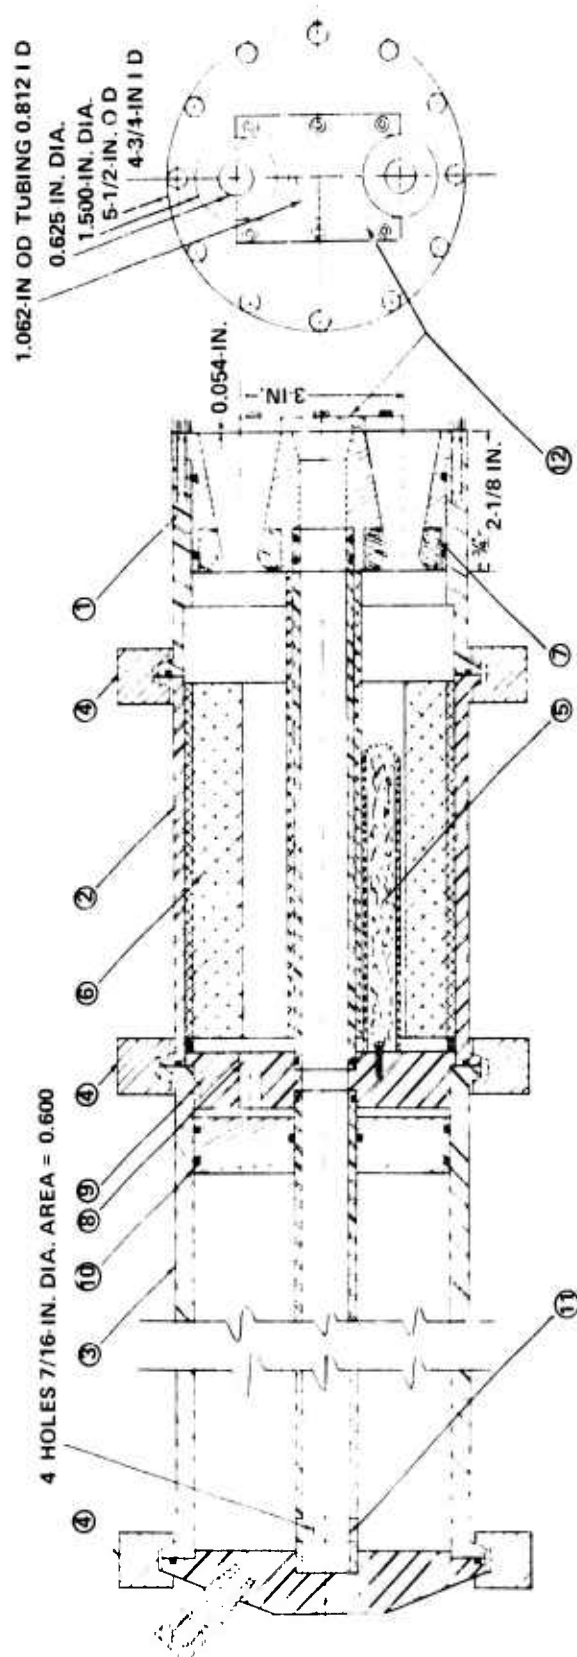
CROSS SECTION OF SLURRY DISSEMINATOR ASSEMBLY
